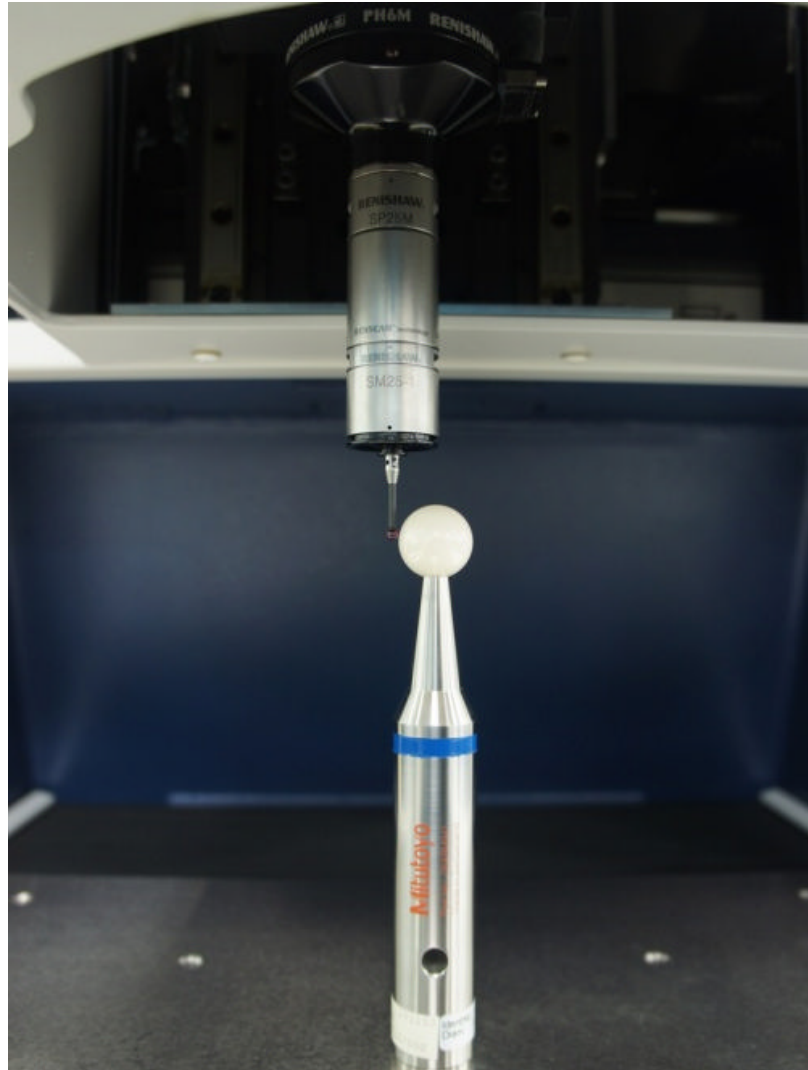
Mitutoyo Legex 322 Coordinate Measuring Machine.
